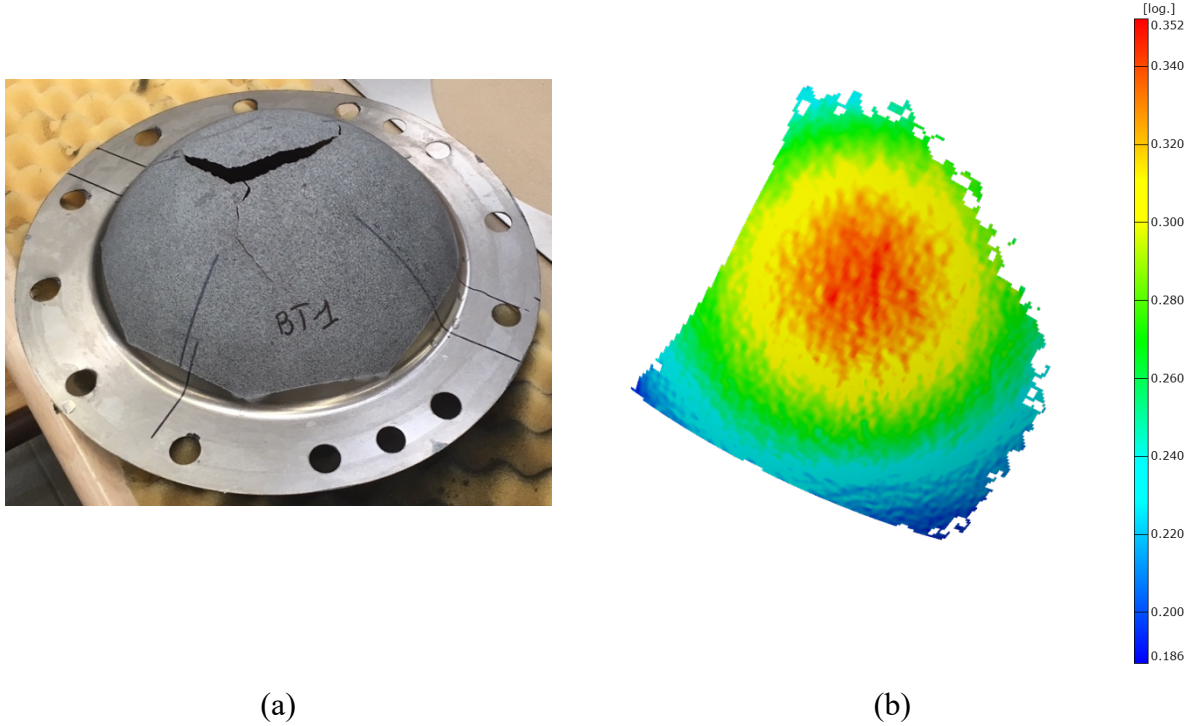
(a) Deformed specimen after hydraulic bulge test; the initial blank diameter is 270 mm
